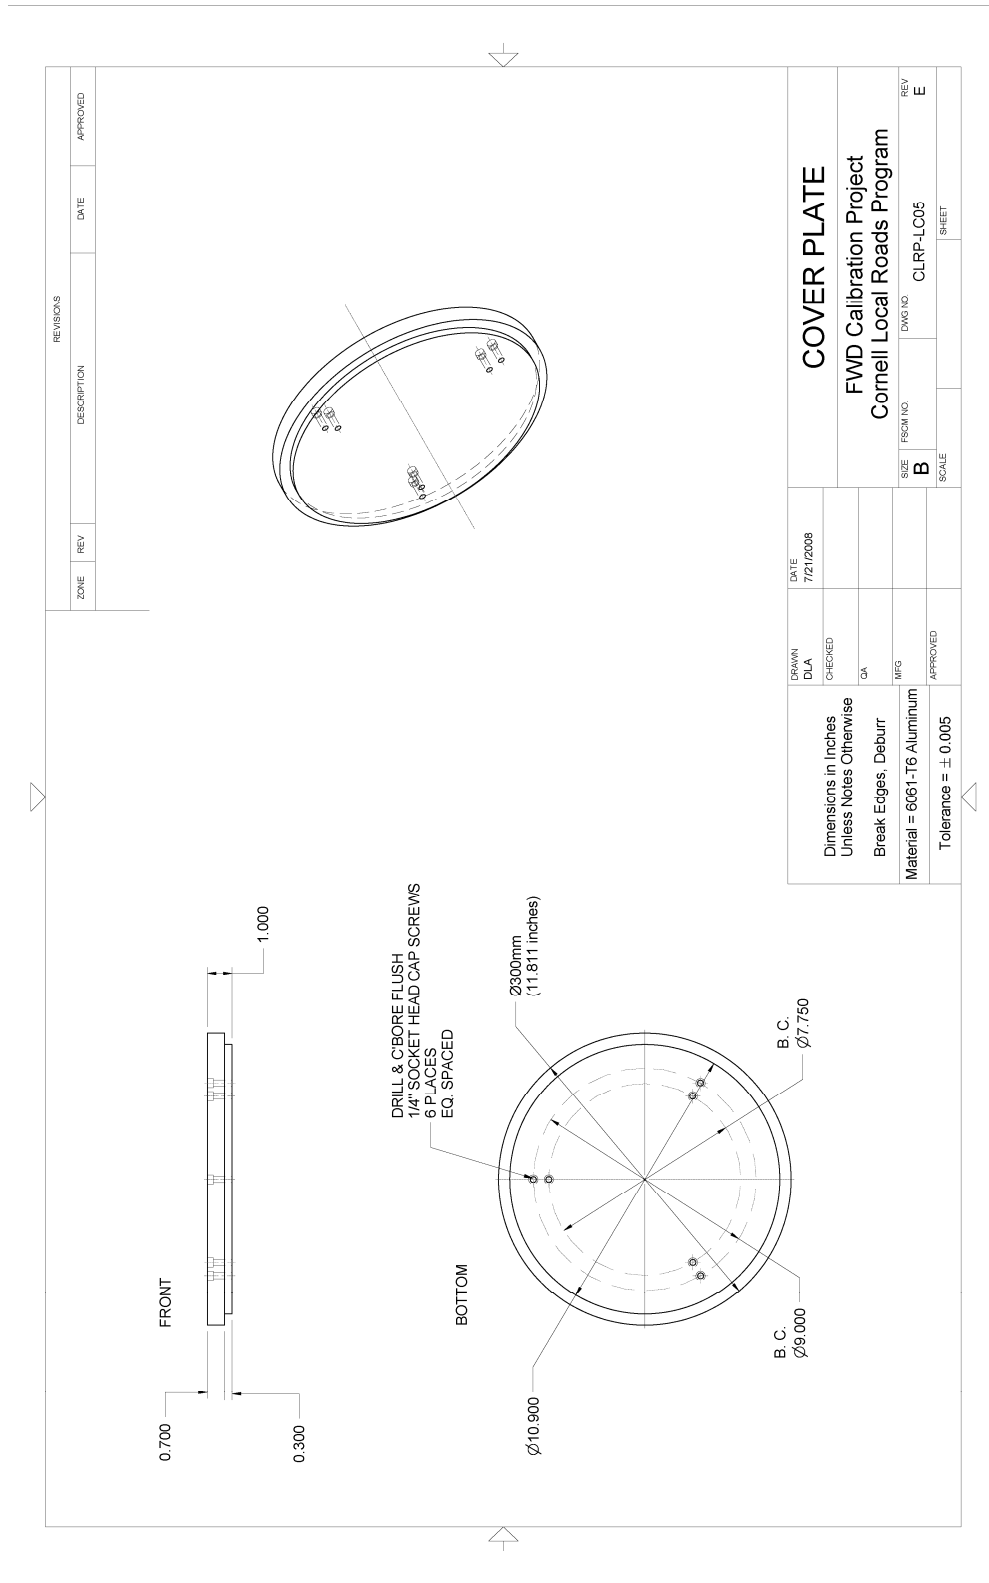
Drawing. CLRP-LC05 Cover Plate.
